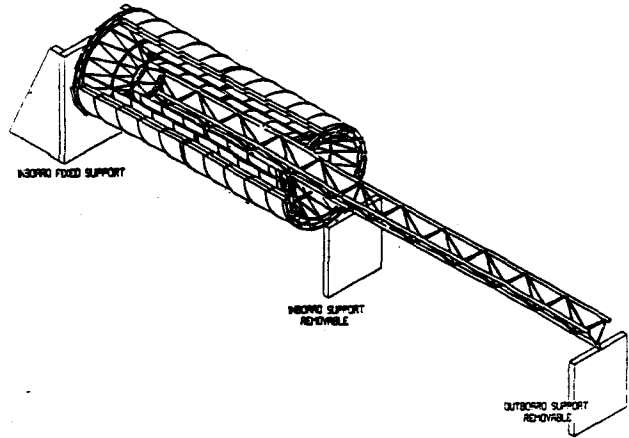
Completed tracking cylinders on assembly fixture.
